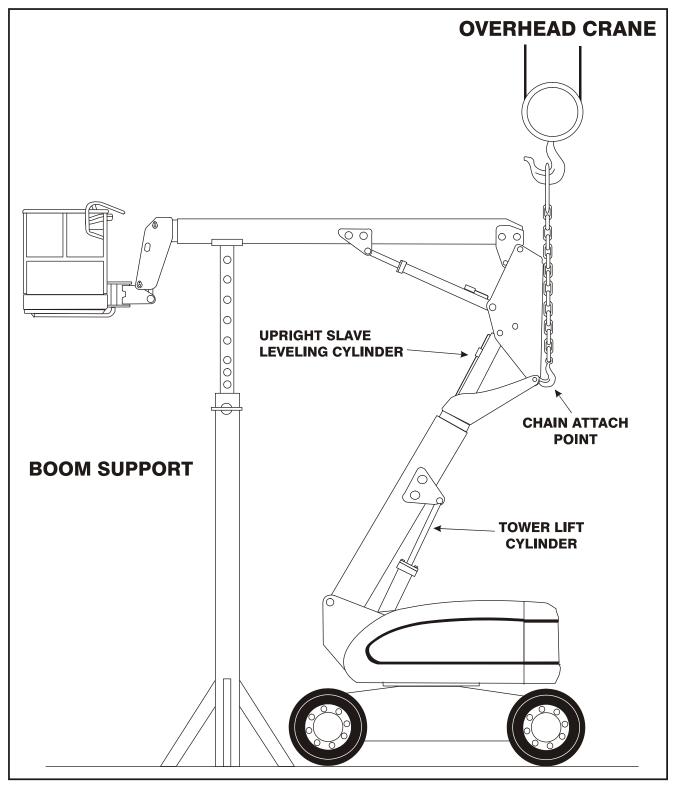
Boom Positioning and Support, Cylinder Repair
